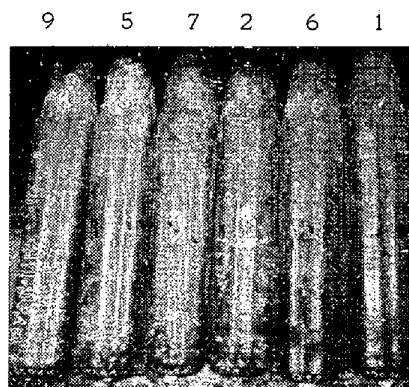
SE 5944 1, 2, 5 1st mold plate, 6, 7, 9 2nd mold plate.
